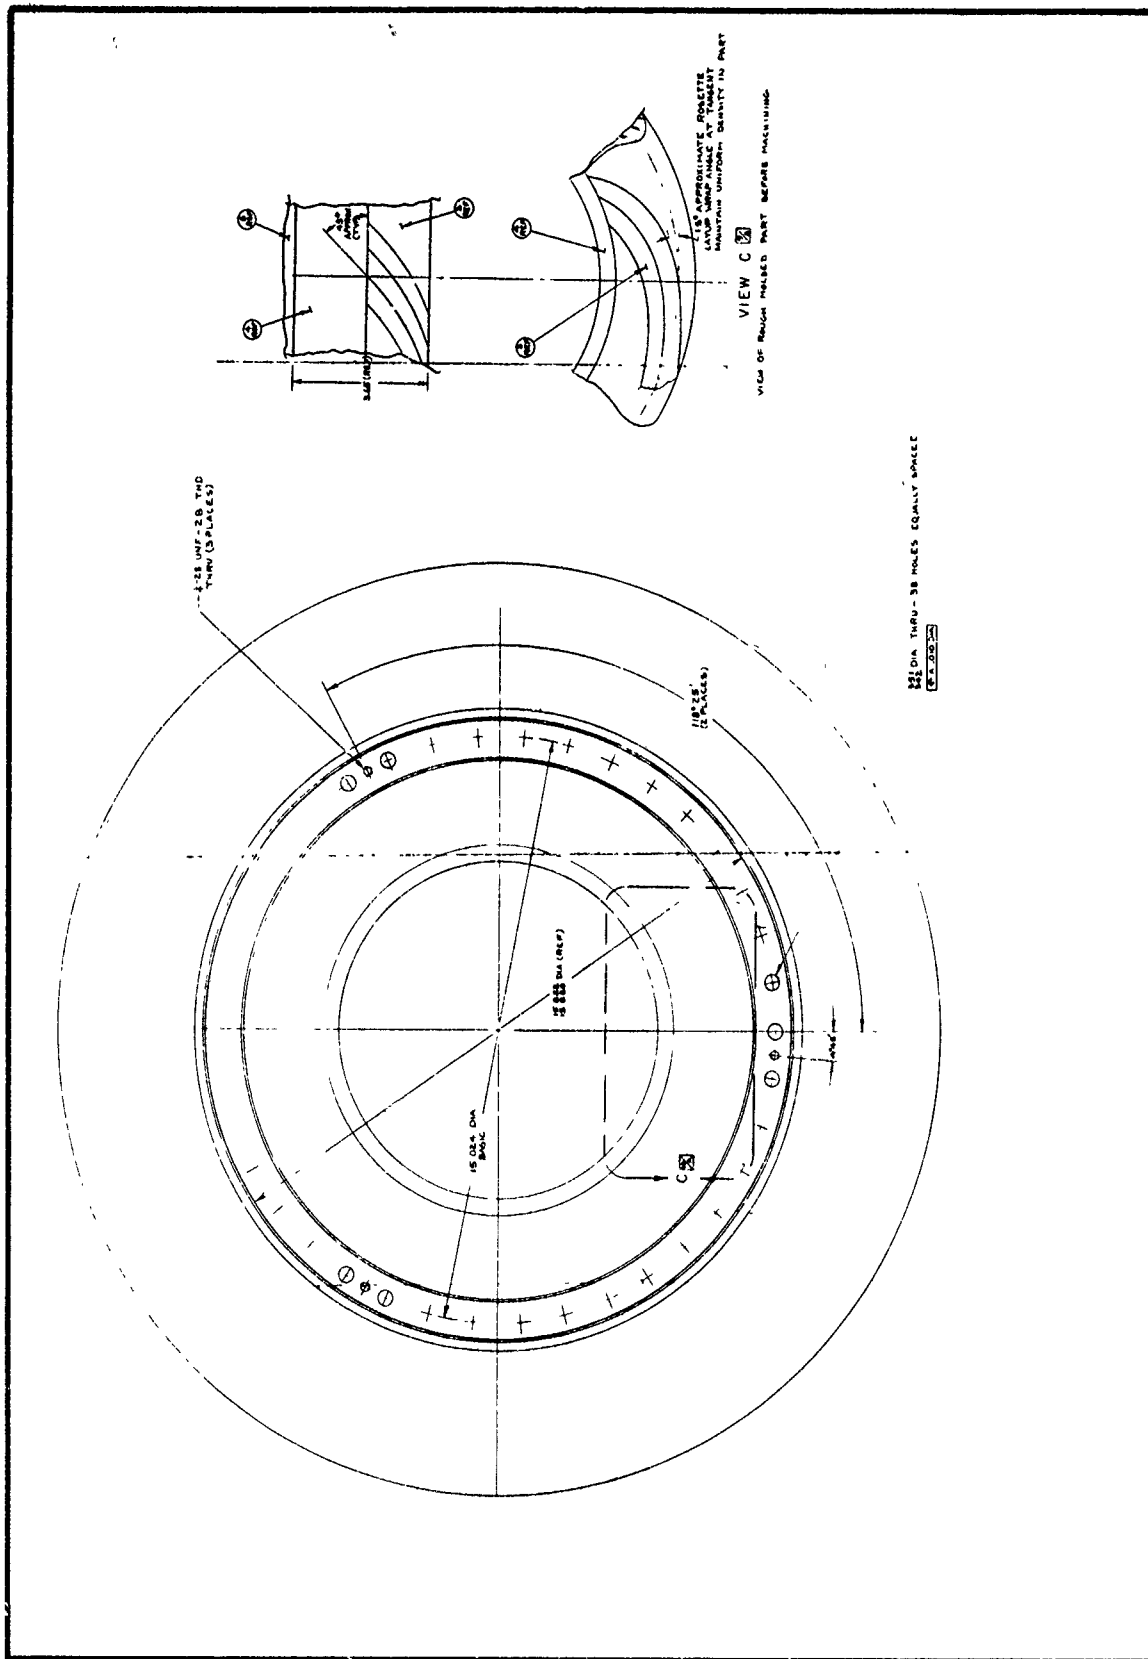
TU-290 Nozzle Design Drawing 9U34907 (Page 2 of 3)
